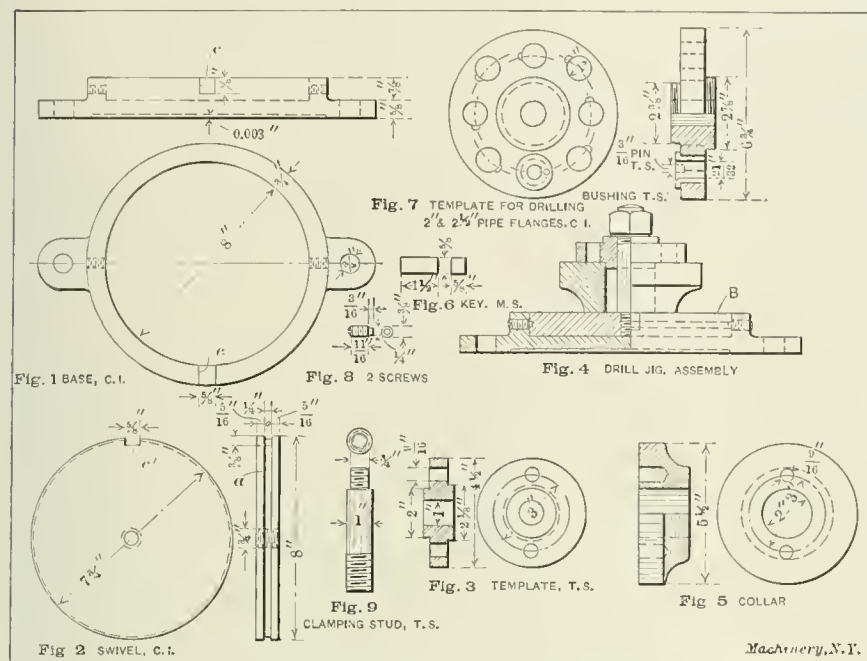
shows a templet which is applied to this type of jig for drilling pipe flanges. The templet shown here is for drilling 2- and 2½-inch flanges, one bushing being used for both sides. A templet of this kind could also be used to advantage for drilling bonnets, cylinder covers and small cylinders of various sizes by using interchangeable bushings to fit over the stud.
